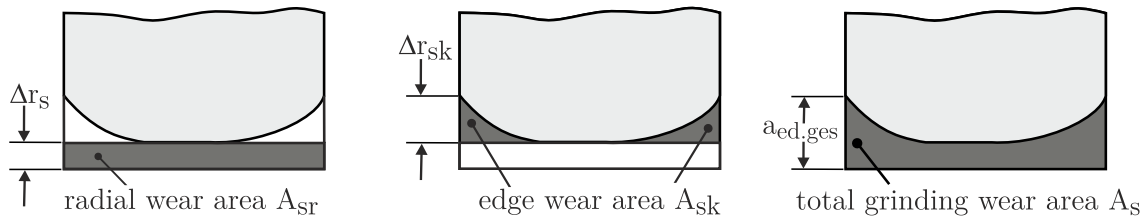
Macroscopic types of grinding wheel wear [KOEN94]
